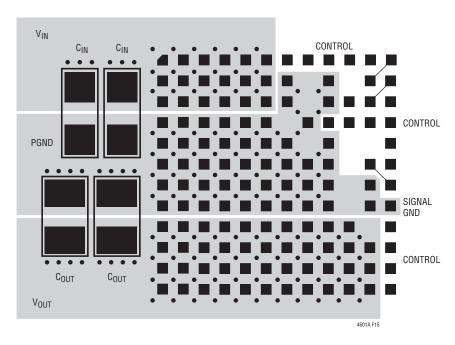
Recommended Layout (LGA and BGA PCB Layouts Are Identical with the Exception of Circle Pads for BGA, See Package Description.)
